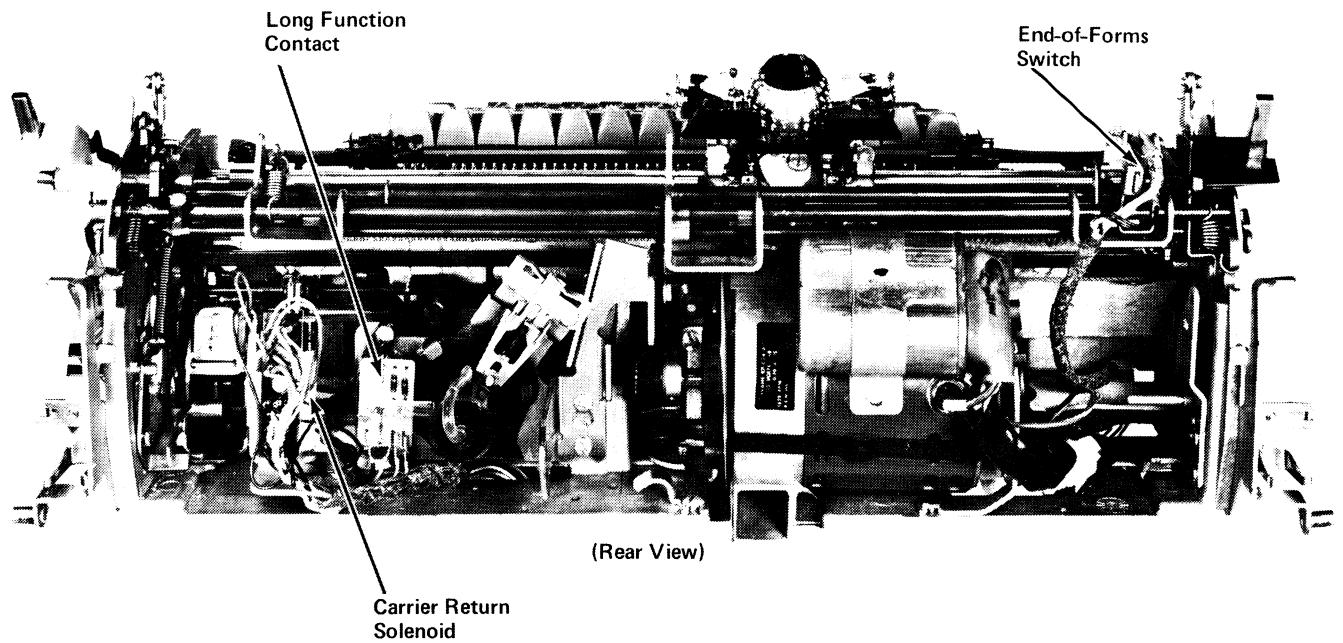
Magnet, Solenoid, and Reed Switch Locations (Rear of Printer)
